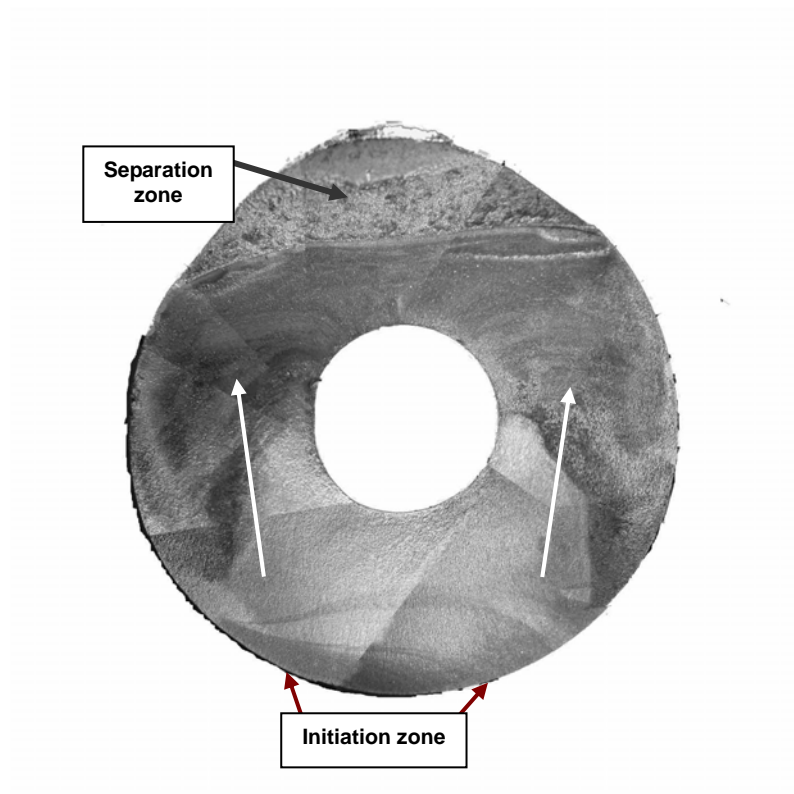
Stereoscopic photograph of fractured or cracked surface of thermowell. Beach marks, crack initiation zone and fracture propagation direction are highlighted with arrows.
